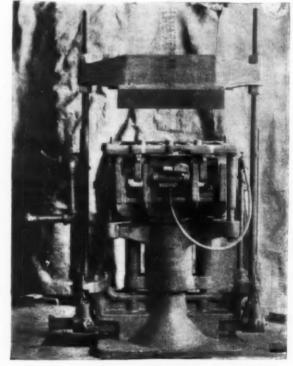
POWER DRIVEN VIBRATOR MACHINE.
